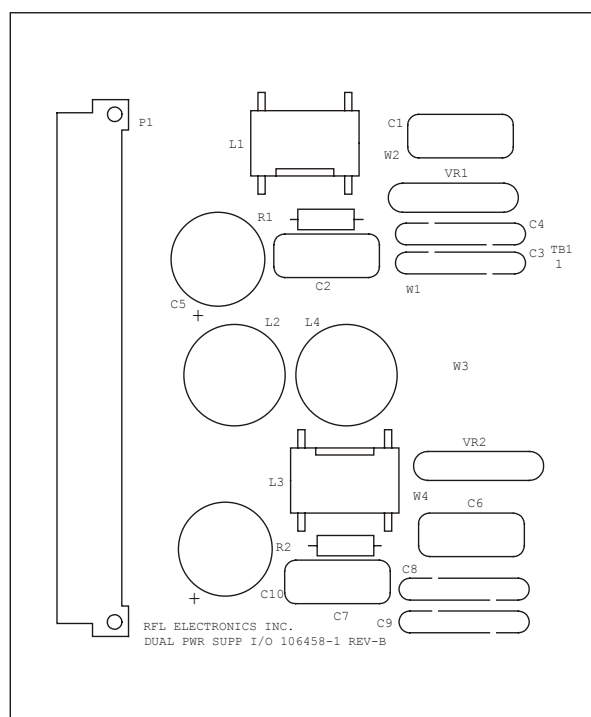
Component locator drawing, Dual Power Supply I/O module
